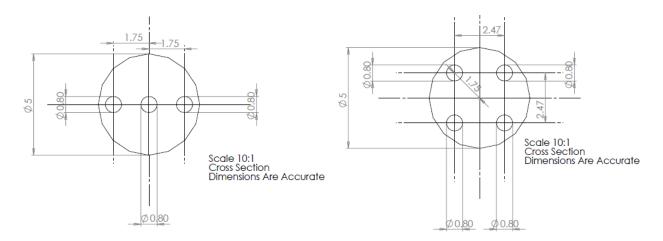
Cross Section Drawings Of Multi-Lumen Tubing
